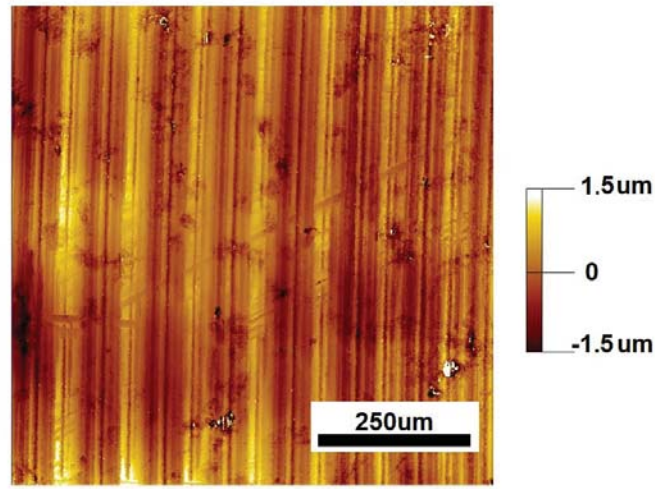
Top view topographic map of AA7050-T7451 following machining. CNC machining marks clearly evident.
